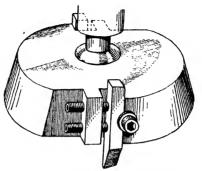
Two-toothed fly cutter for milling duralumin.
